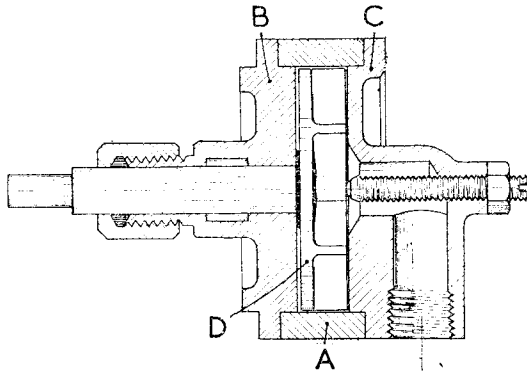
Sectional drawing of the pump, showing: A—the body; B—the gland plate; C—the cover plate; and D—the rotor
